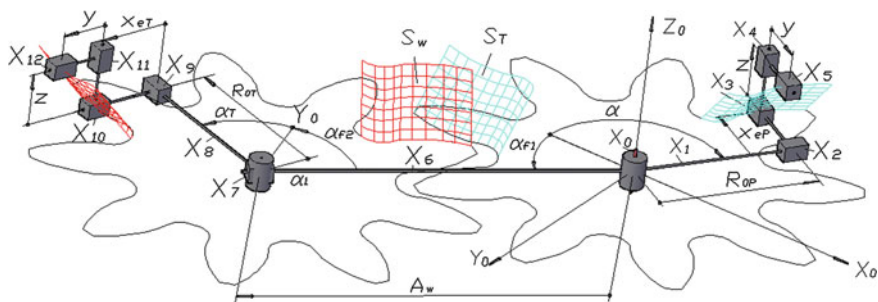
GMS for gamma surface for gear chamfering mechanism
